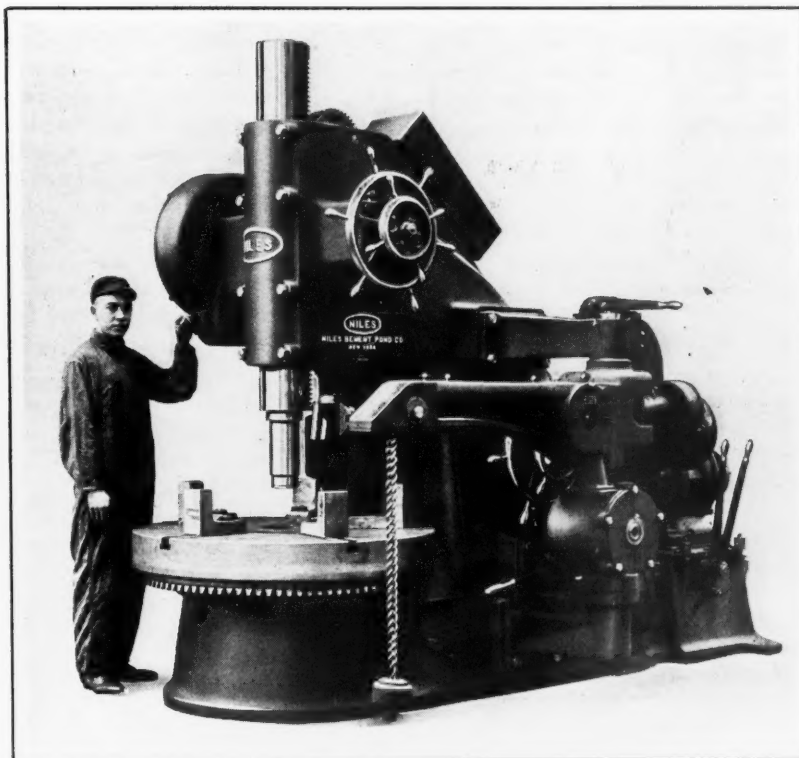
Forty-eight-inch Car-wheel Borer with Hub-facing Attachment
